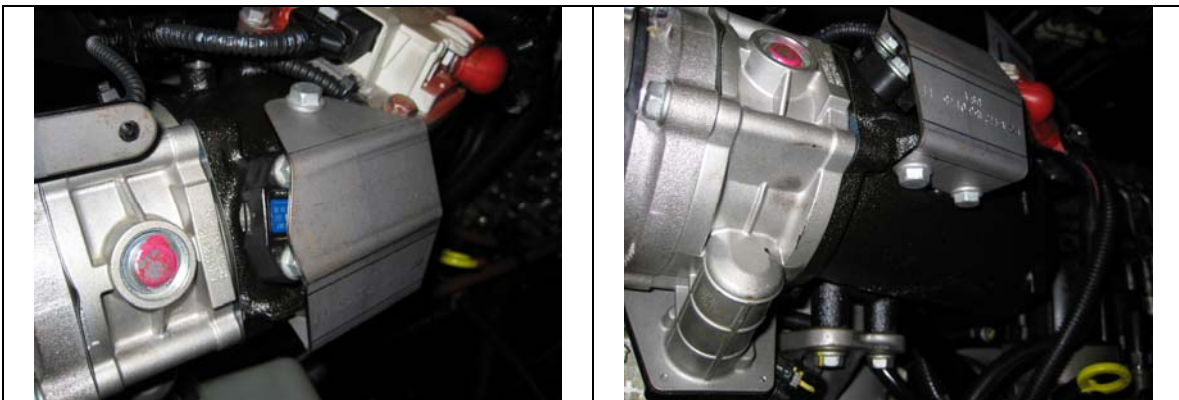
Installation of Intake Manifold Pressure Sensor Bracket
